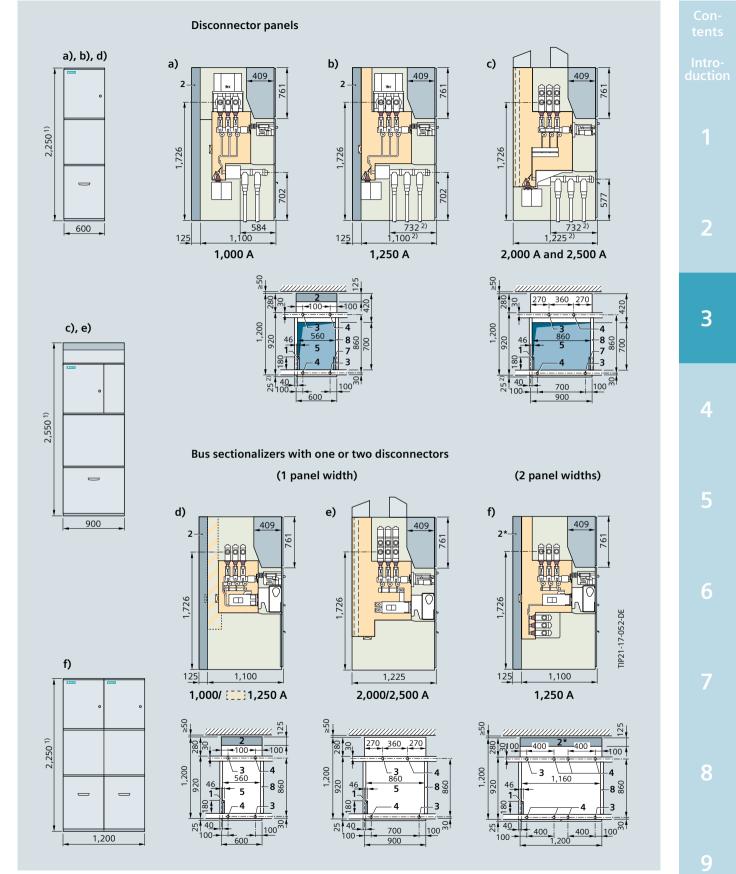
/6: Front and side views as well as mounting surfaces with floor fixing points for disconnector panels and bus sectionalizers of NXPLUS C with single busbar (dimensions in mm; legend and footnotes see Fig. 3/3 on page 54)
